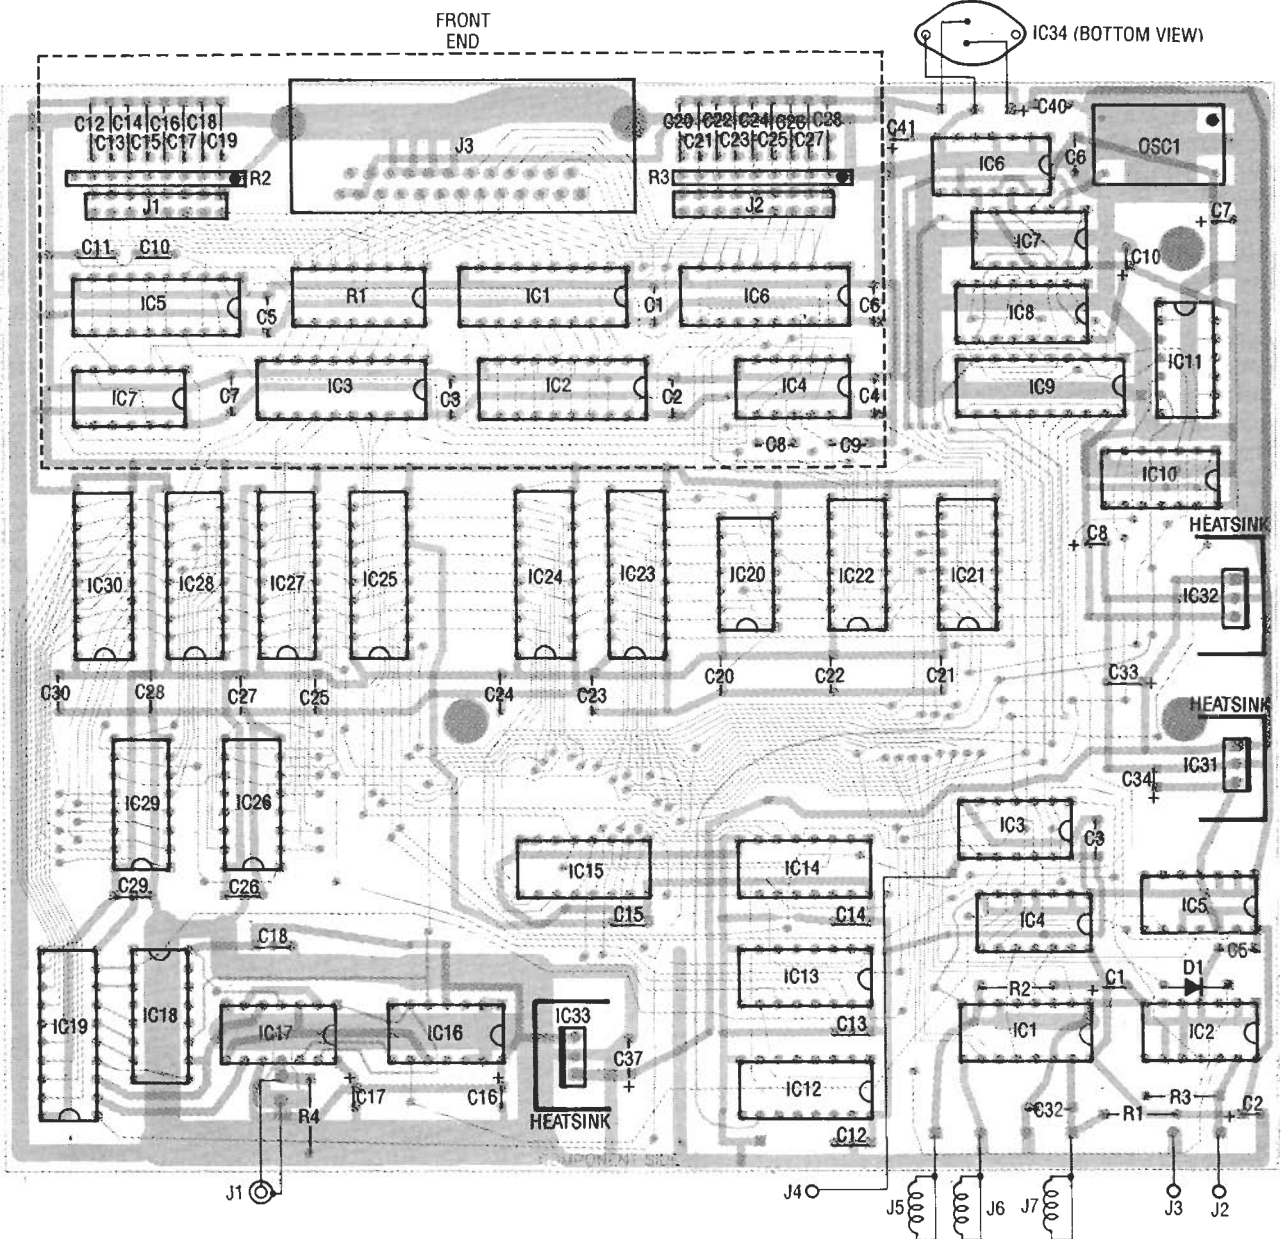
PARTS-PLACEMENT DIAGRAM. Note that the Front End section is contained on the T1001 board shown with a dark line around it. There are separate Parts Lists for the sections, so be sure not to confuse them. (The extra holes where capacitors are mounted are for accommodating capacitors of different sizes.)
